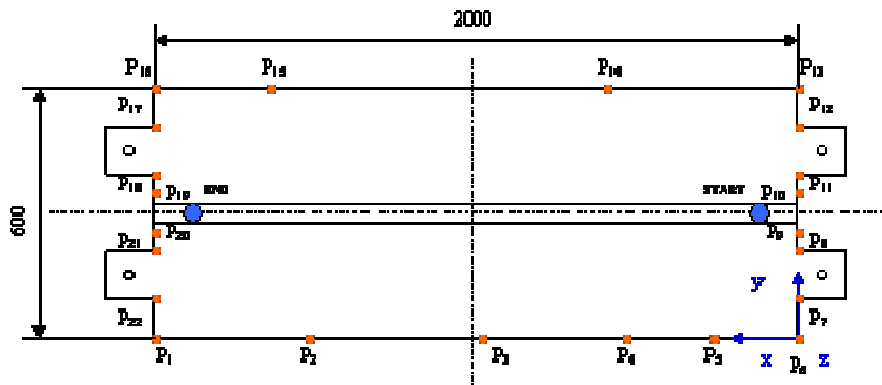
Friction Stir Welding of concept 4 having LBW stringers (V534-H1504-006)
